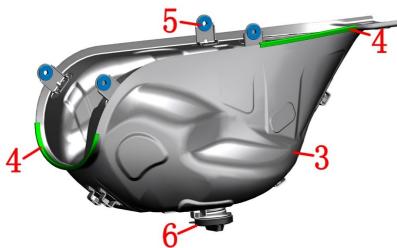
FUEL TANK		Tank liner component	CHK	(2)
